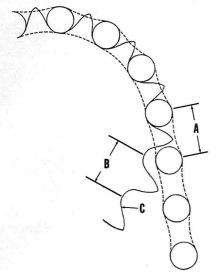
Chain pitch (A) must exactly equal sprocket pitch (B) to prevent excessive wear on bearing edge of sprocket tooth (C). Refer to text.
